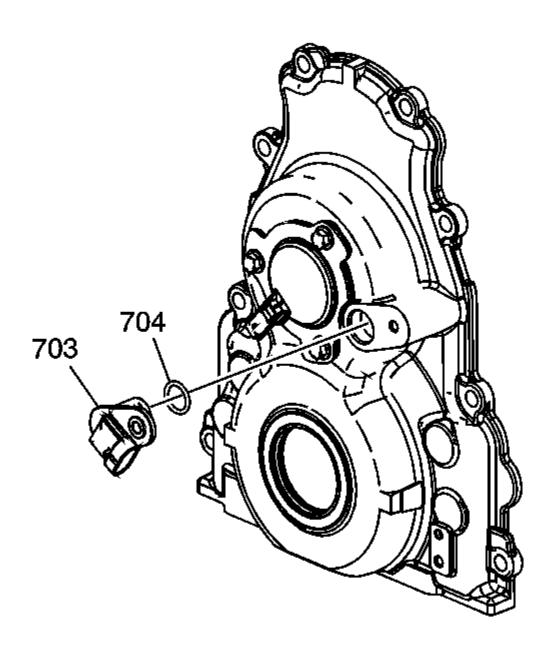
View Of CMP Sensor & O-Ring Courtesy of GENERAL MOTORS CORP.
